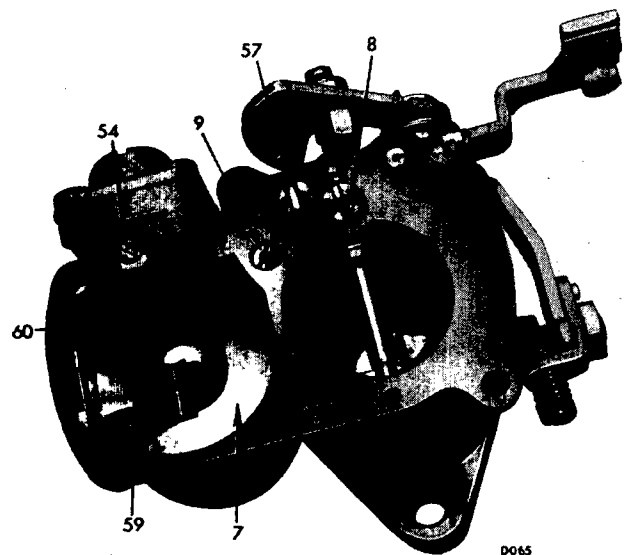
B30 PSE1 carburettor, showing the top cover removed
